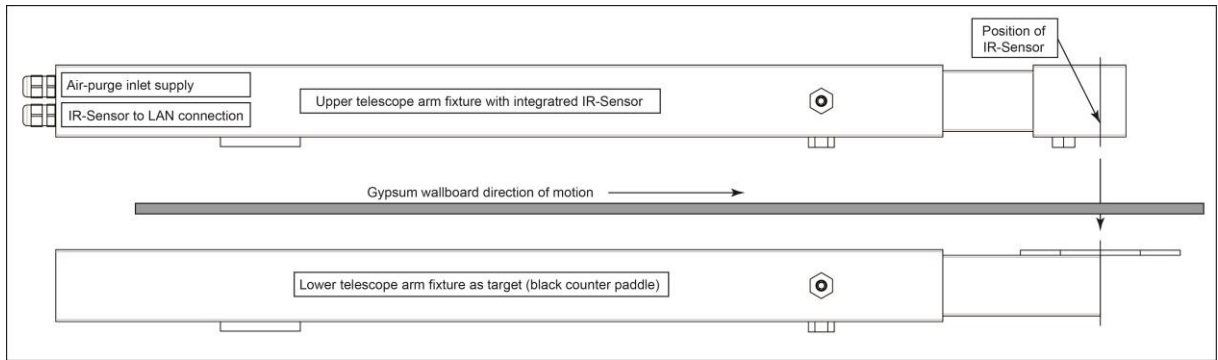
Upper and lower telescope arm fixtures installed after kiln exit
